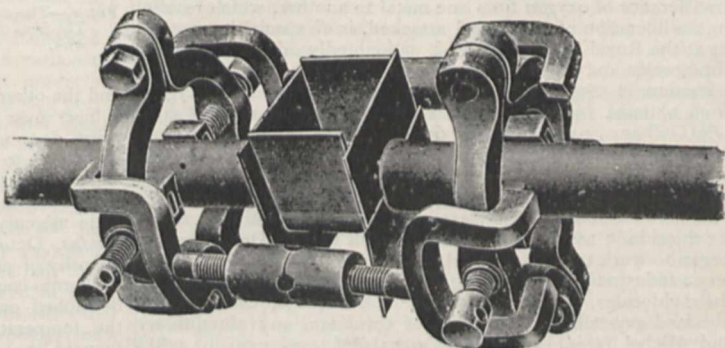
Tubes clamped together with a casing of thin iron round the junction to be welded.
